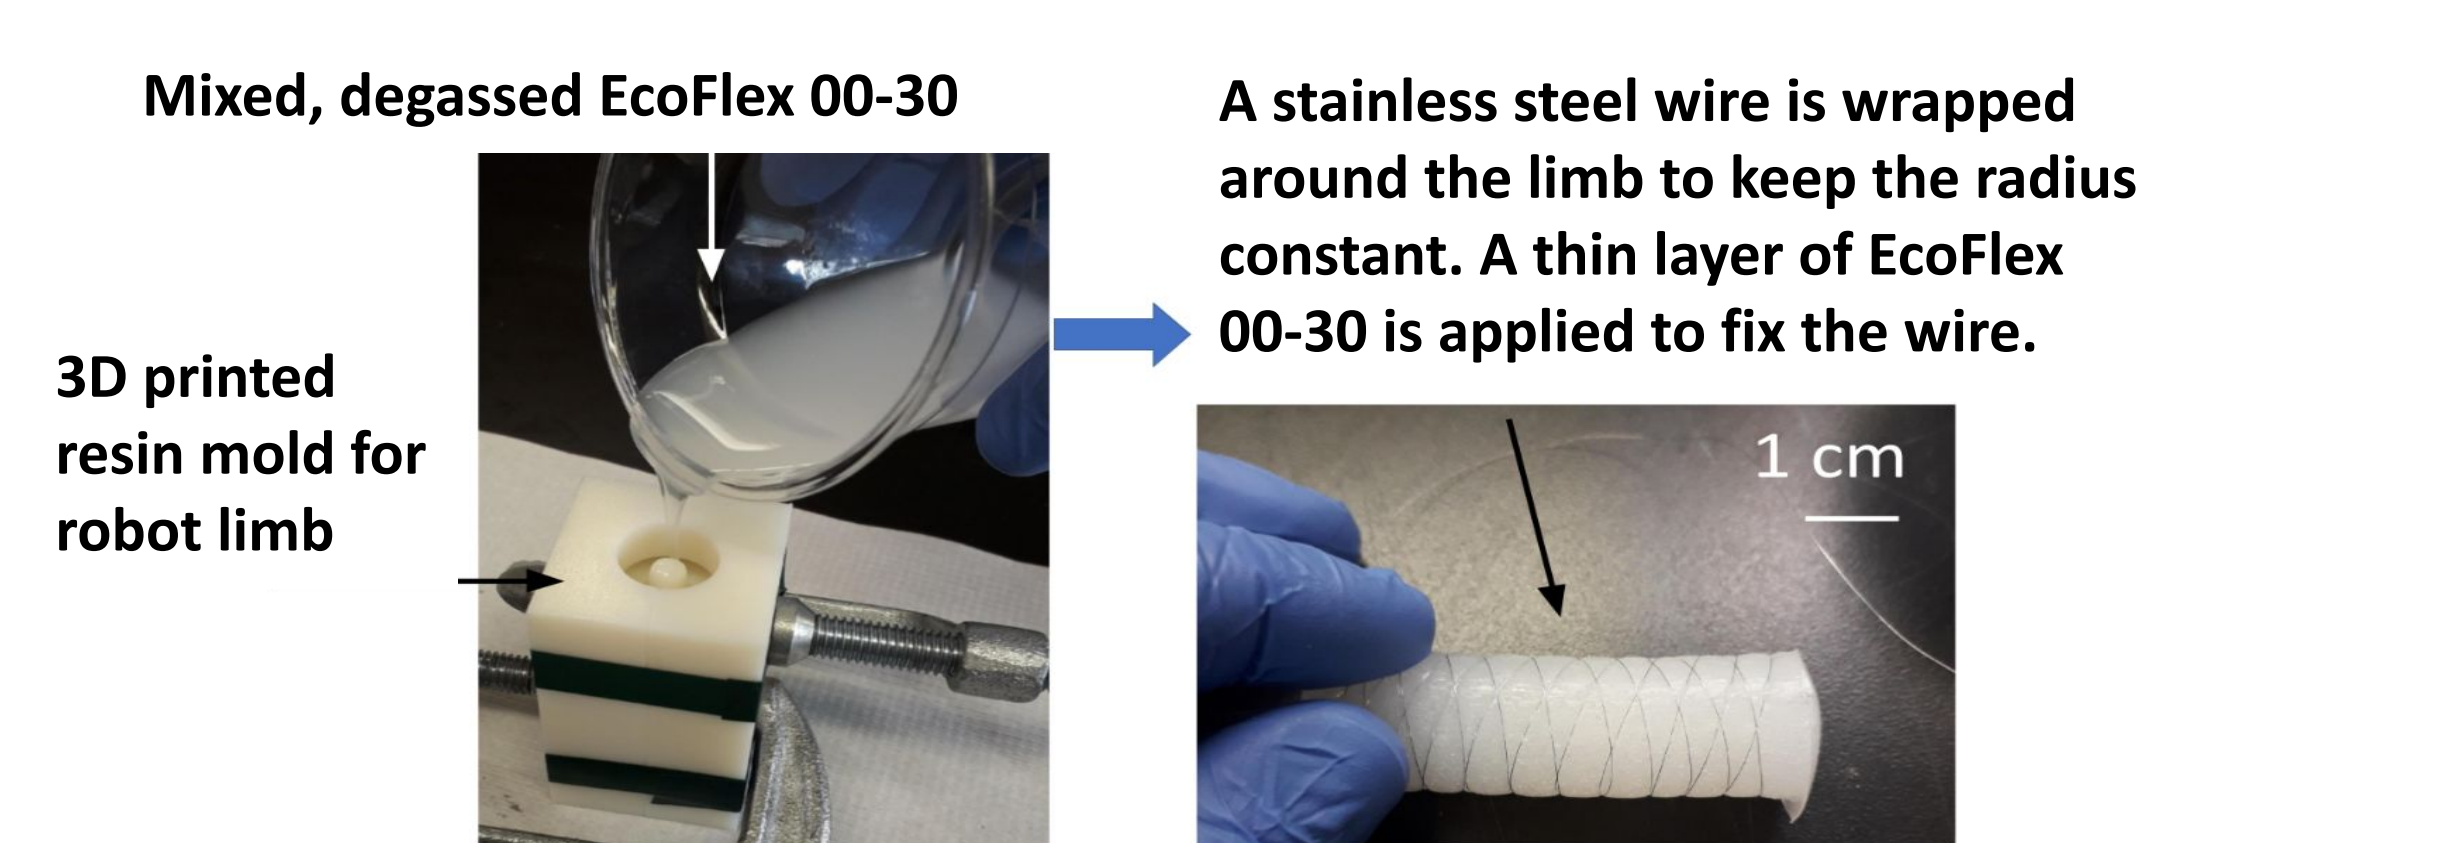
Fabrication process of the robot limb actuator using 3D printed resin mold and EcoFlex 00-30.
